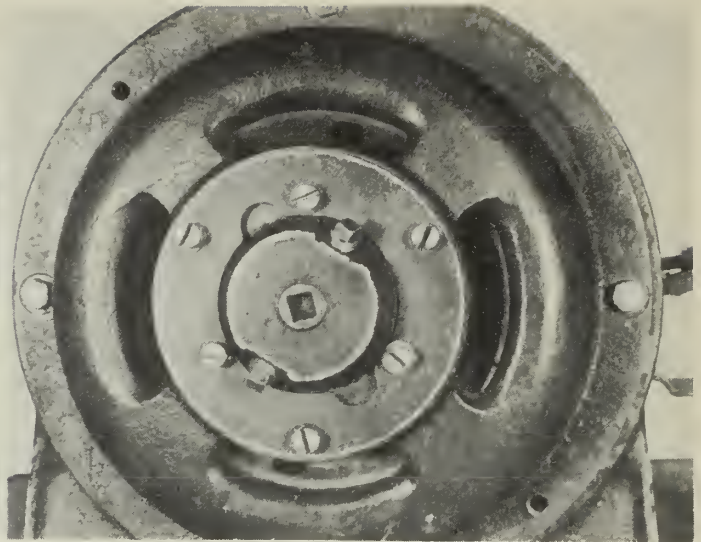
A sealed grease-packed ball bearing that should be inspected for grease about once a year. In greasing, both plugs are removed, and the grease is forced in through the top hole with a pressure gun until it comes out through the bottom hole. The motor should then be run for several minutes with the holes open to allow the excess grease to be forced out.
